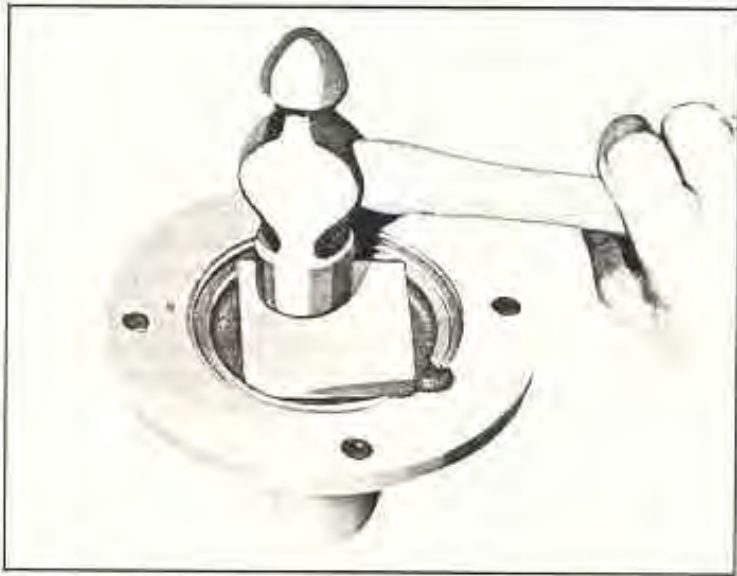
B-21 Installing Front Bearing Retainer Oil Seal
